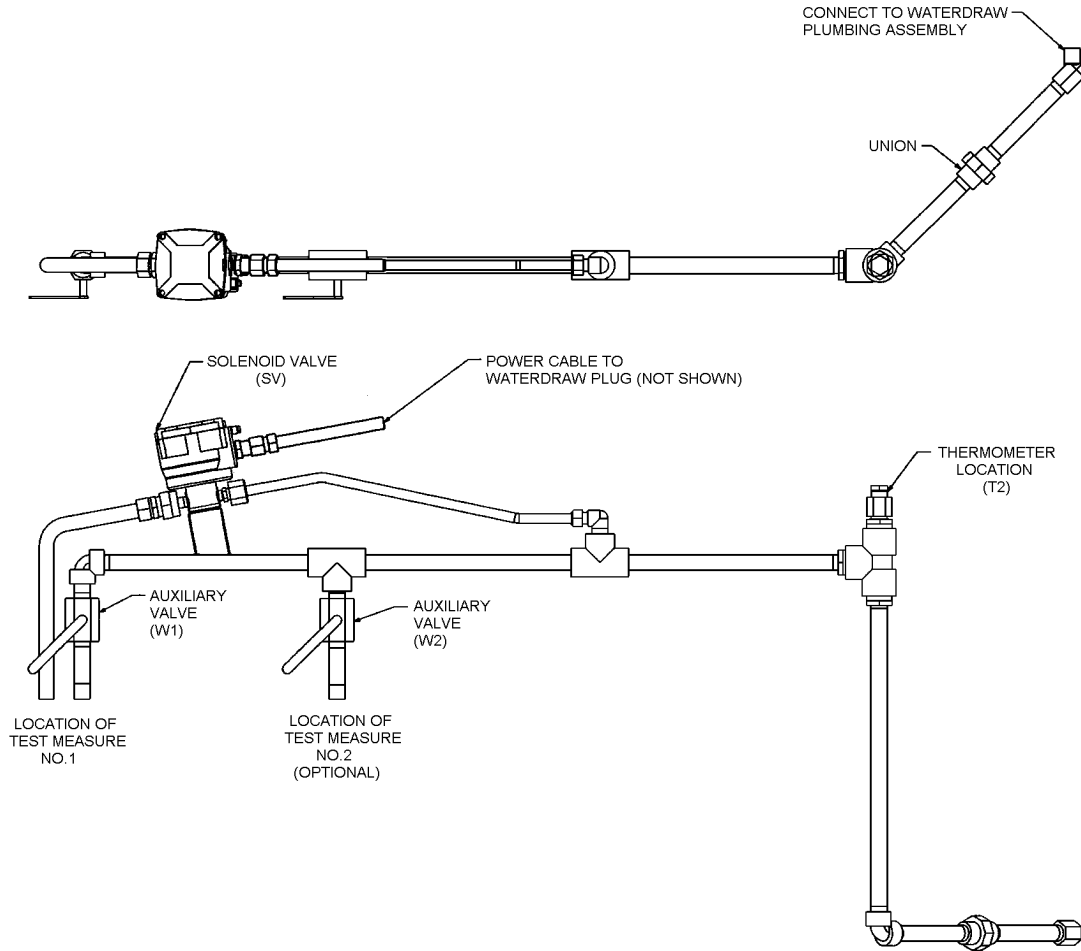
Compact Prover Water Draw Assembly (Continued)
